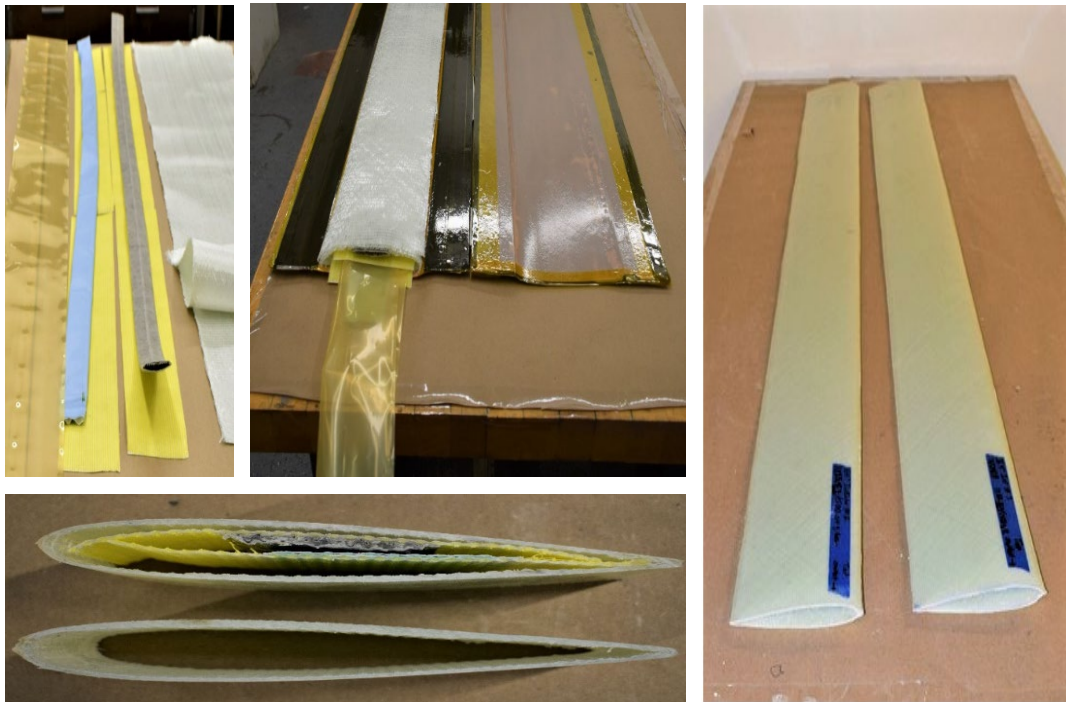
Initial manufacturing process to infuse a 32"-long hollow airfoil cross section. From left to right shows the Resin inlet and outlet, Consumables on the mandrel, preform in mold, fully bagged mold, airfoils after demolding.
